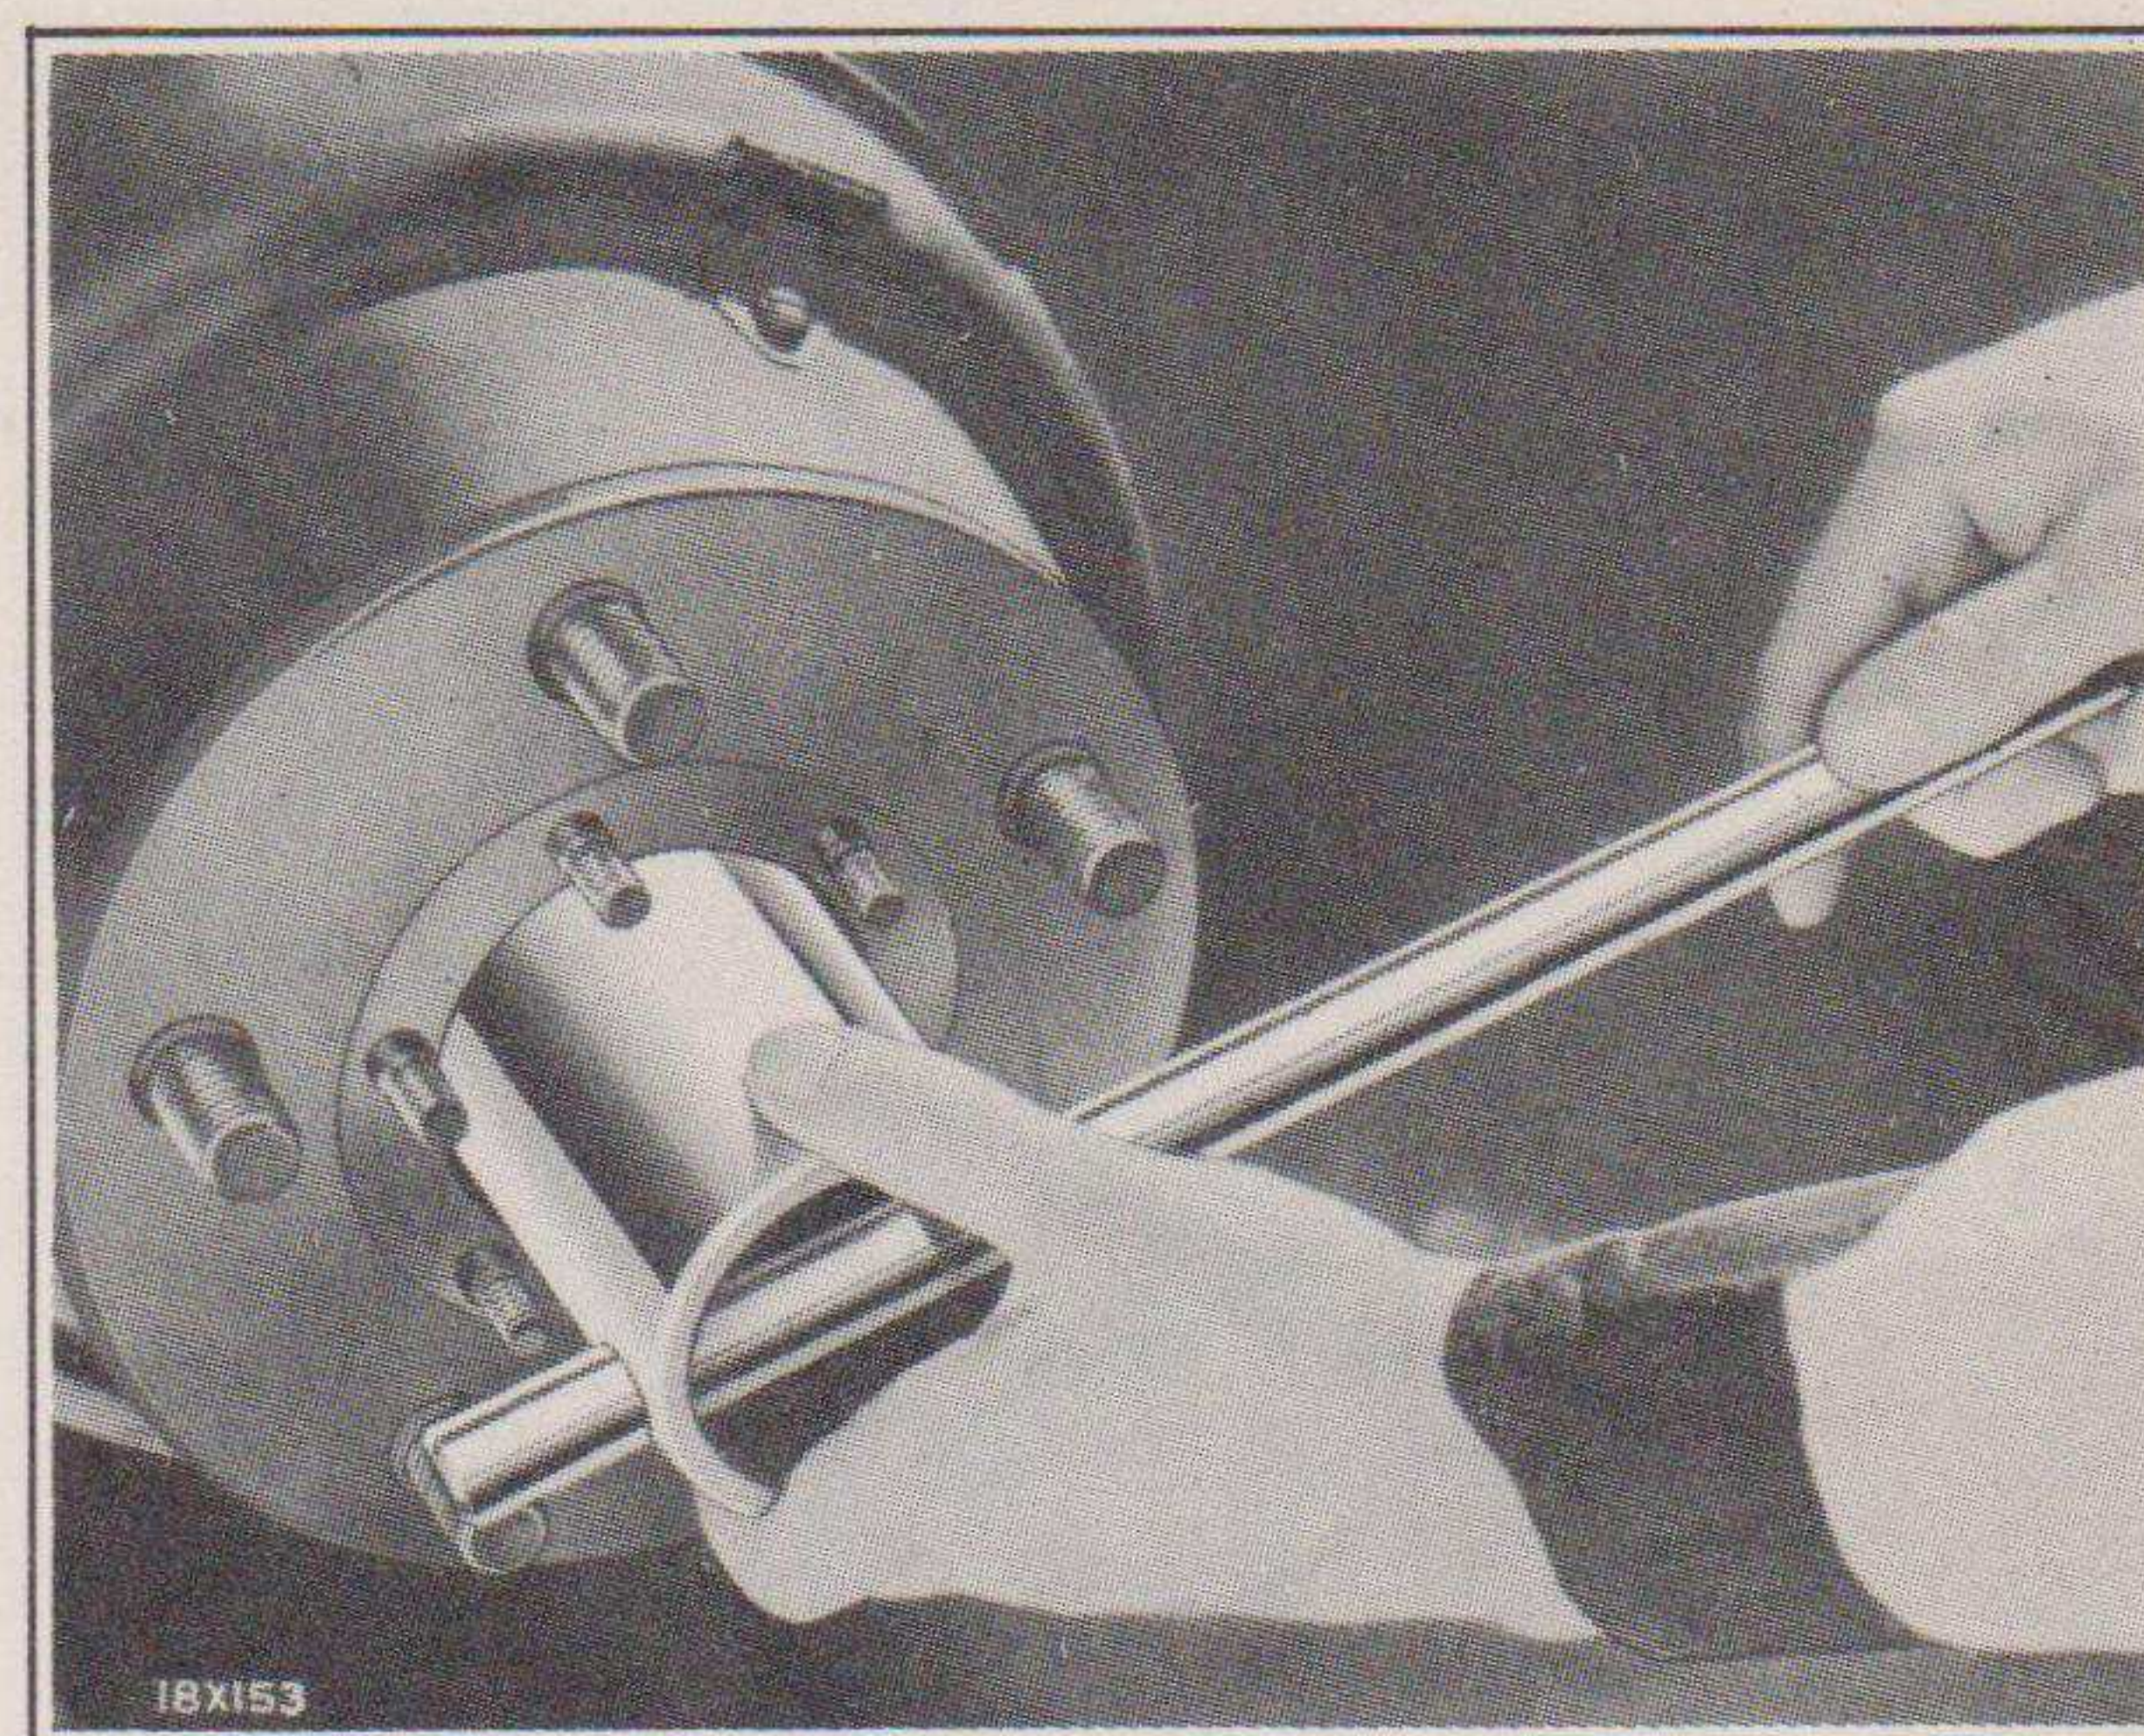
Removing Front Wheel Bearing Adjusting Nuts or Adjusting Bearings (Tool DD-824)
